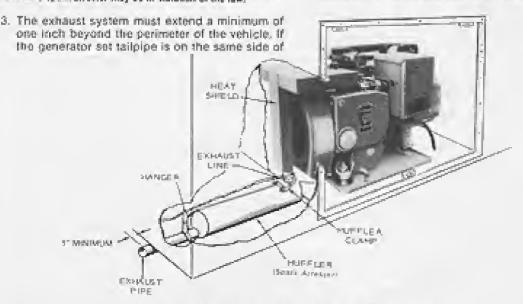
TYPICAL EXPLAUST SYSTEM INSTALLATION
